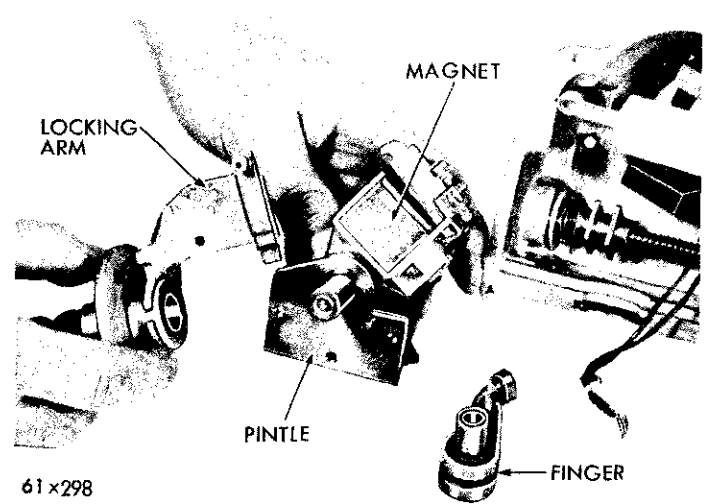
Assembling the Locking Arm on the Pintle Shaft
